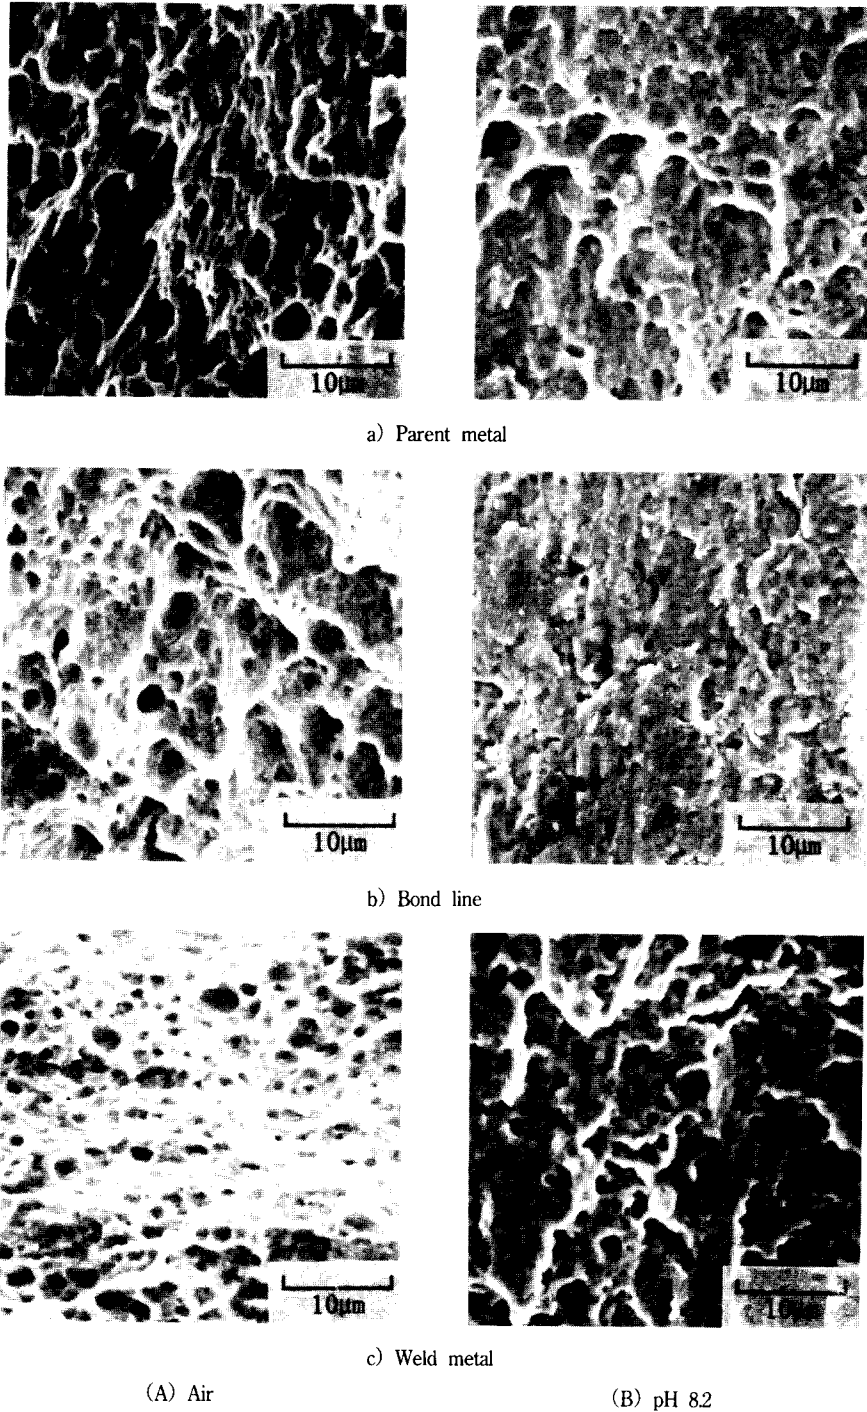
SEM microfractographs in HT80 steel-weld joint
